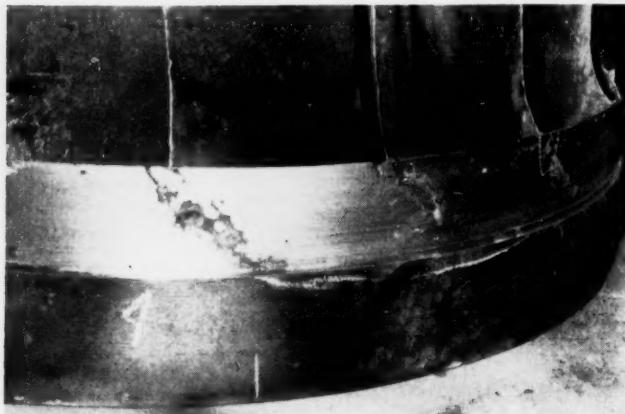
Close-up view of runner after machining off the pitted areas. Note "piping" holes.
